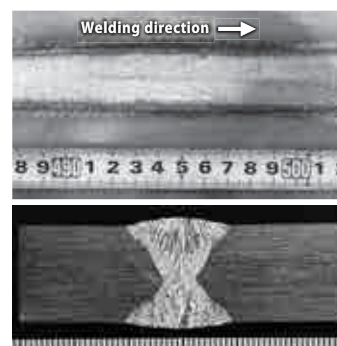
Bead appearance and macro-structure of US-2209 / PF-S1D butt joint
